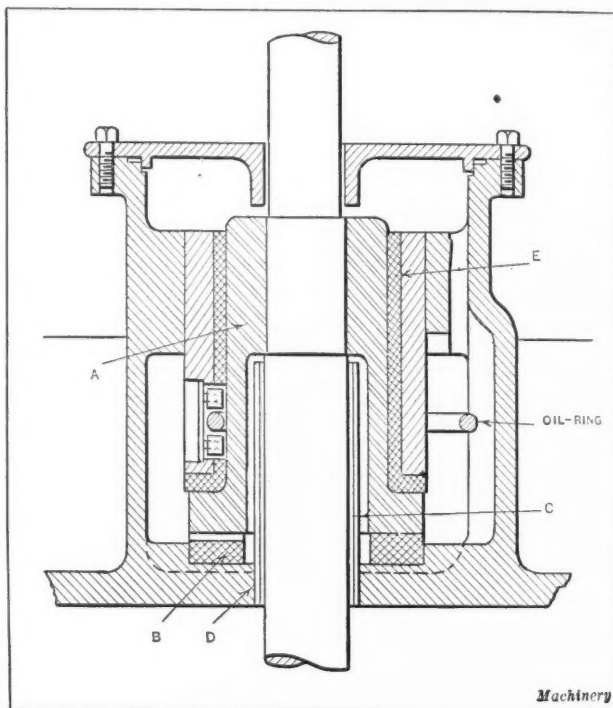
Bearing designed for Use in approximately a Vertical Position
